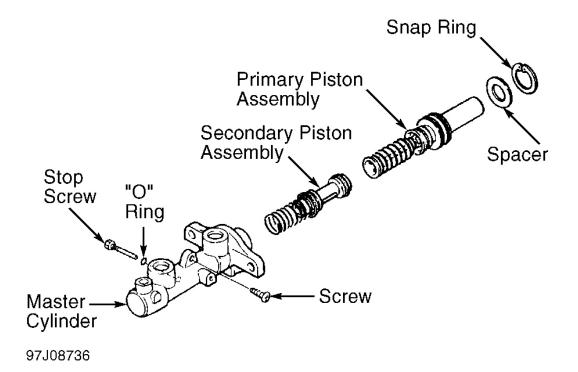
Exploded View Of Master Cylinder (Miata With ABS, MX-3 With ABS, RX7 & 929) Courtesy of MAZDA MOTORS CORP.
